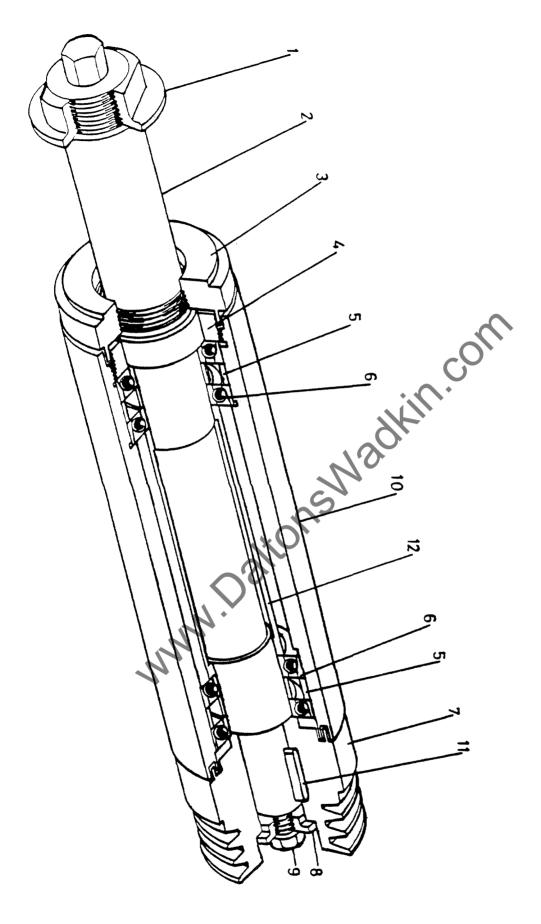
FENCE SIDE HEAD SPINDLE UNIT
